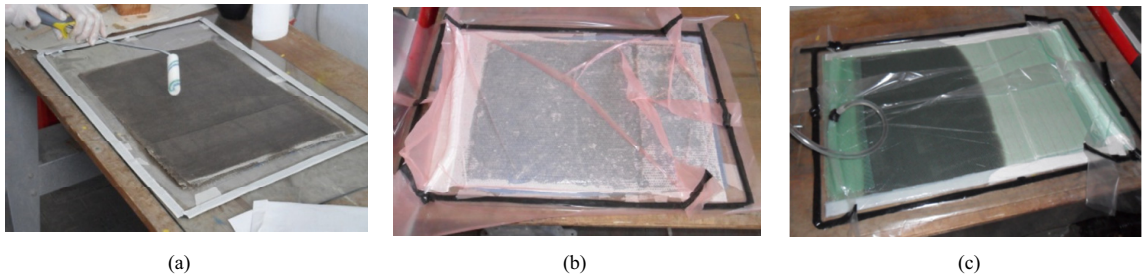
(a) hand lay-up impregnation; (b) Vacuum bagging assembly; (c) intermediate stage of resin flowing in the resin infusion process.
